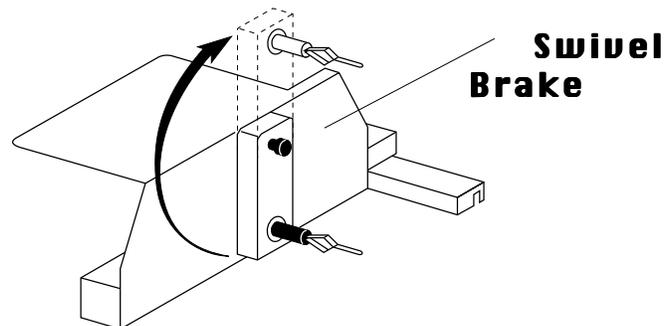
Adjusting the Swivel Arm on the Motor Assembly
